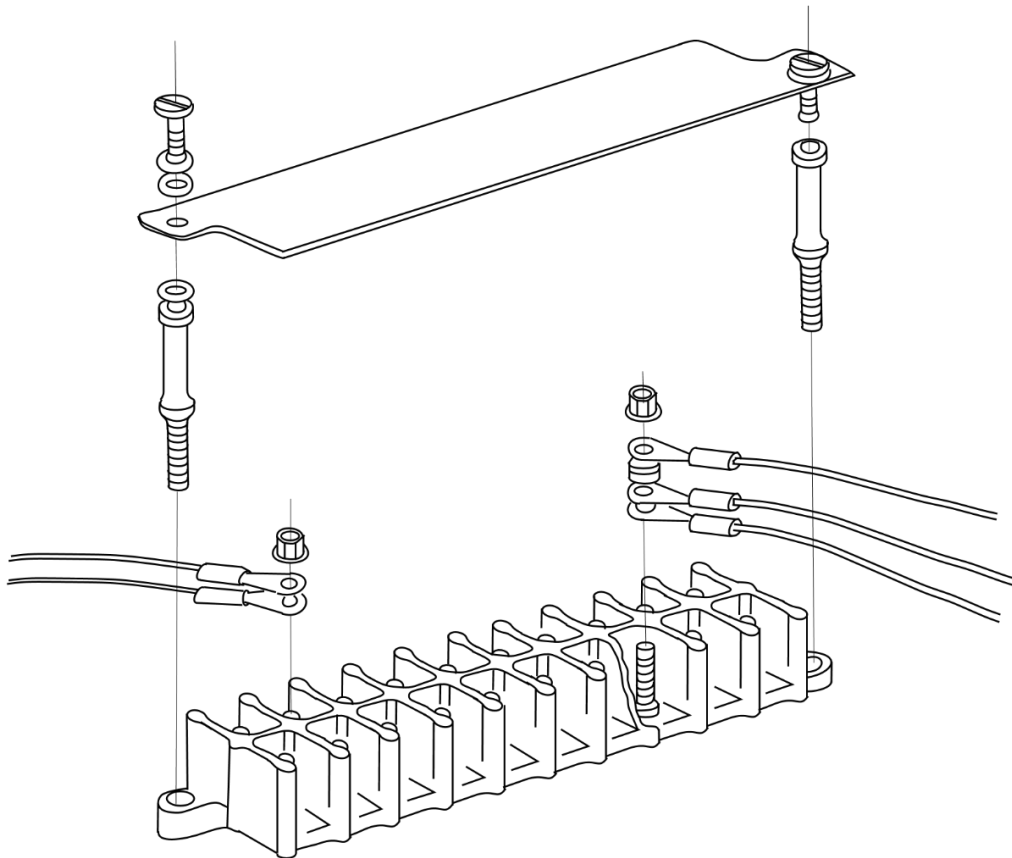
Assembly of Terminal Lugs to Ward Brooke Terminal Boards
